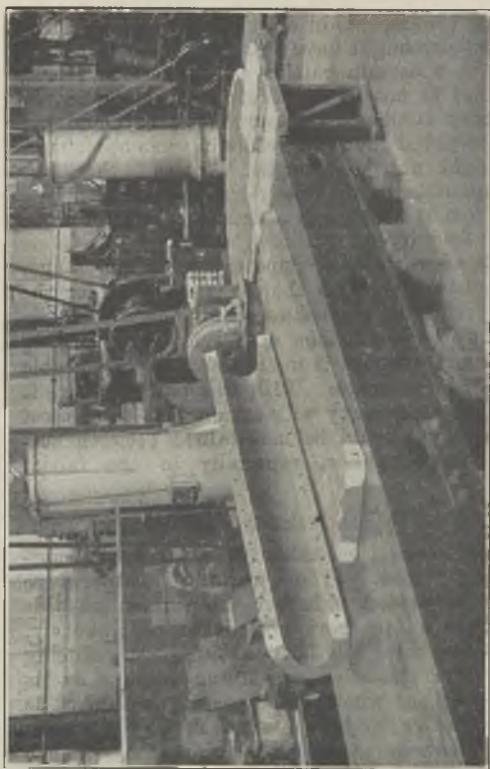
CHROME HEAT-RESISTING CASTINGS TO WITHSTAND 650 DEG. C., SHOWN MACHINED.
